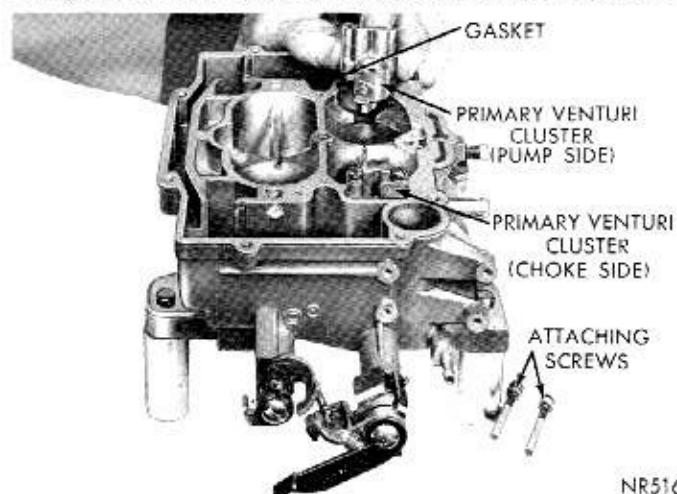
Removing or Installing Accelerator Pump Jet Housing
